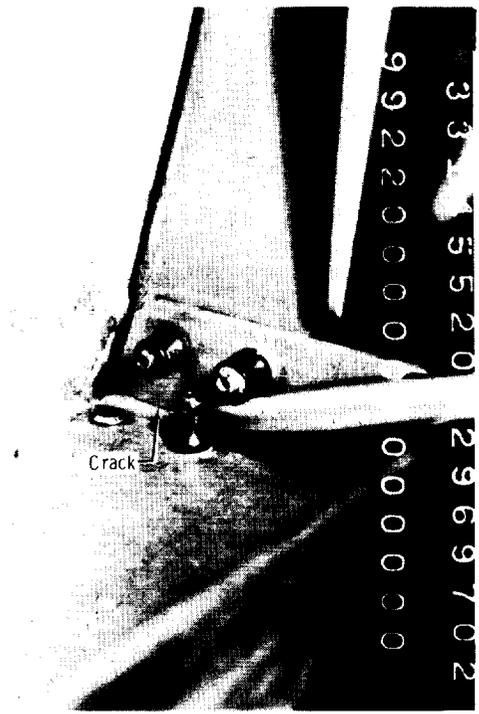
Crack in the radius of a machined longeron made of type 7079-T652 aluminum alloy.
